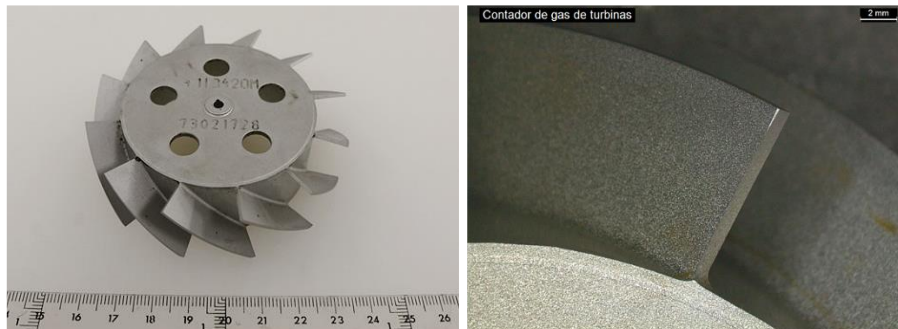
Aluminum gas meter rotor and detail of rotor blade
